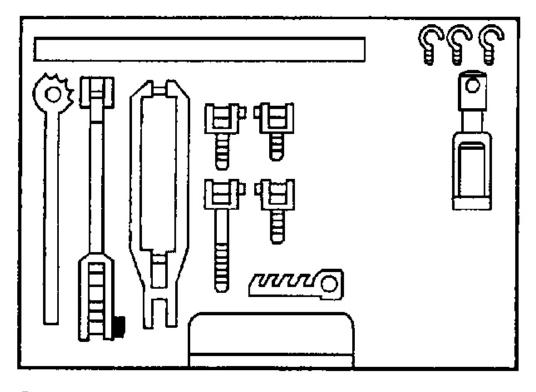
Identifying Rear Seal Installer 9100 Courtesy of DAIMLERCHRYSLER CORP.
